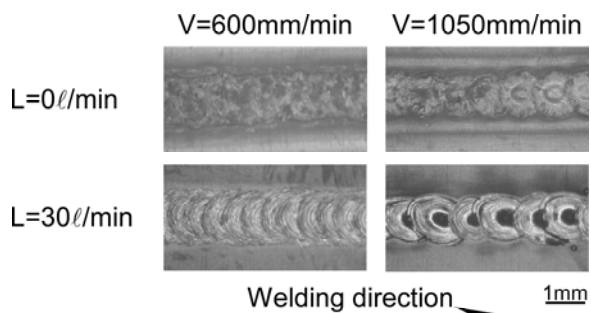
Appearances of weld bead. (Surface bead)
